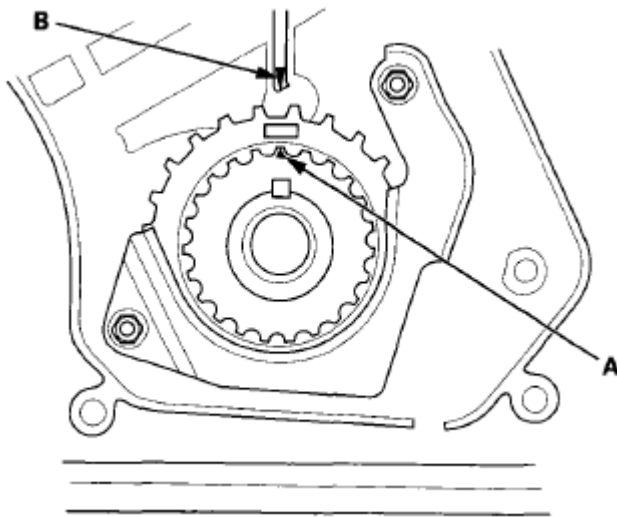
Identifying TDC Mark And Pointer On Oil Pump
